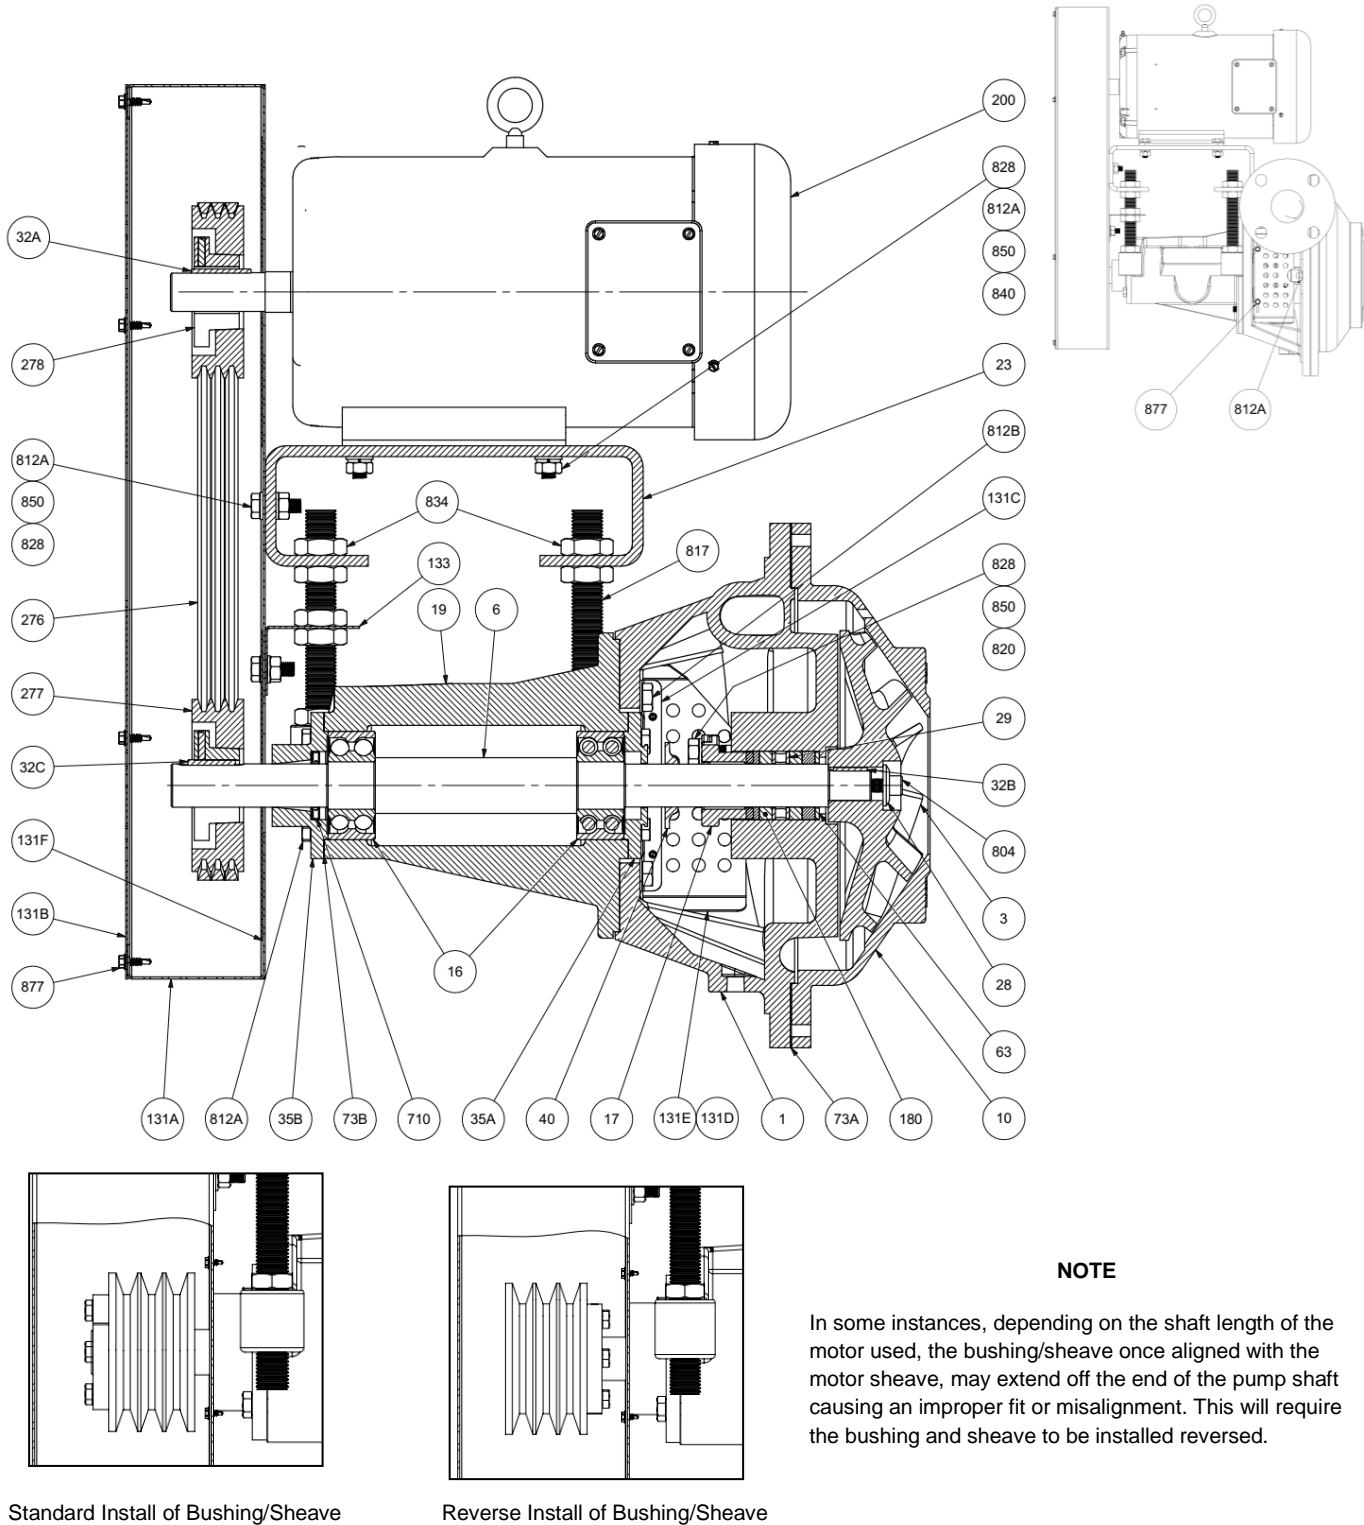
Sectional Assembly with Overhead Drive (Shown with Packing)
